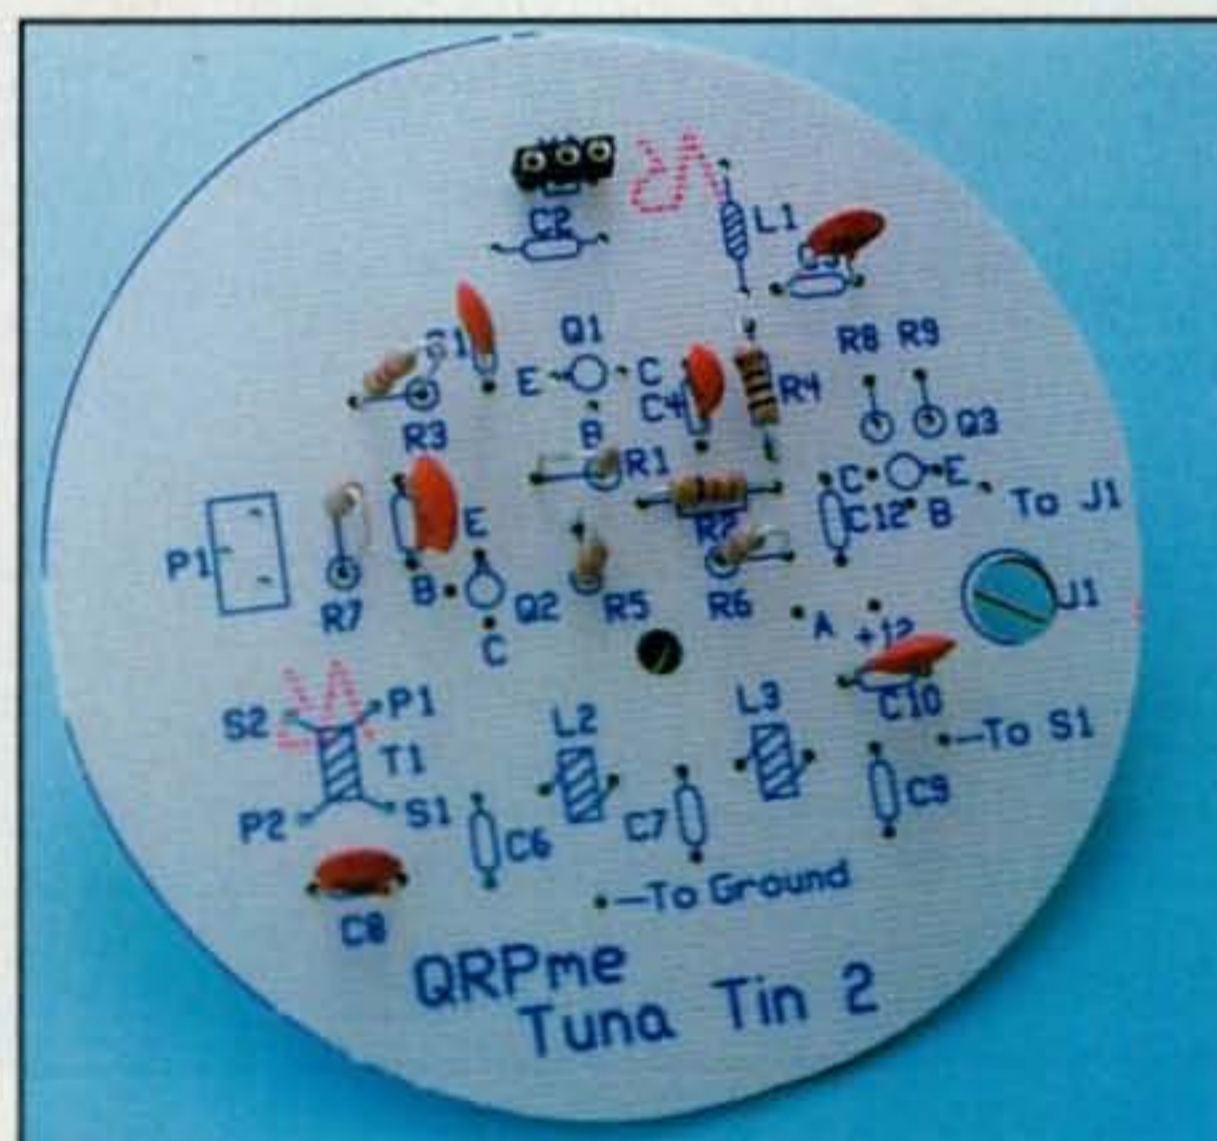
Assembly of the Tuna Tin 2 gets under way. The board is roomy and well marked, making assembly rather easy. It is an ultimate compliment to original designer and QRPer extraordinaire Doug DeMaw, W1FB. Nice!
